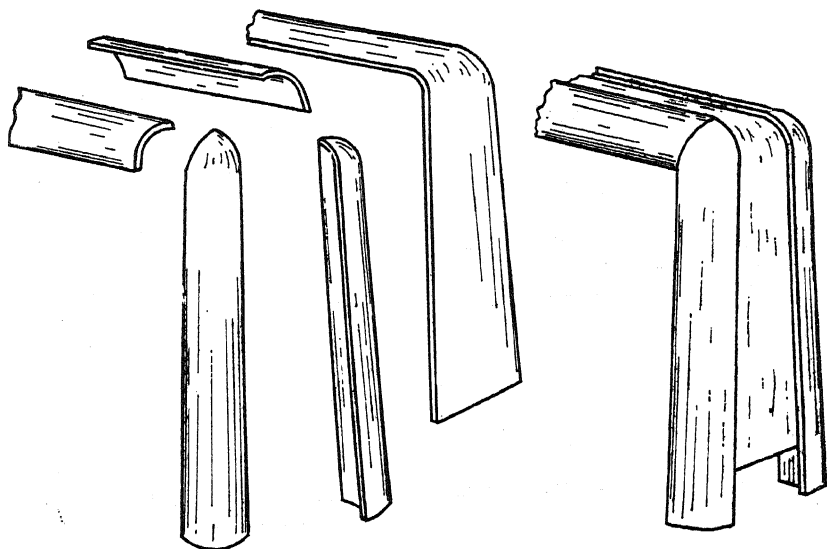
Corner detail of a streamlined support. Pressed steel plates give pleasing appearance with the strength and stiffness of steel construction.
